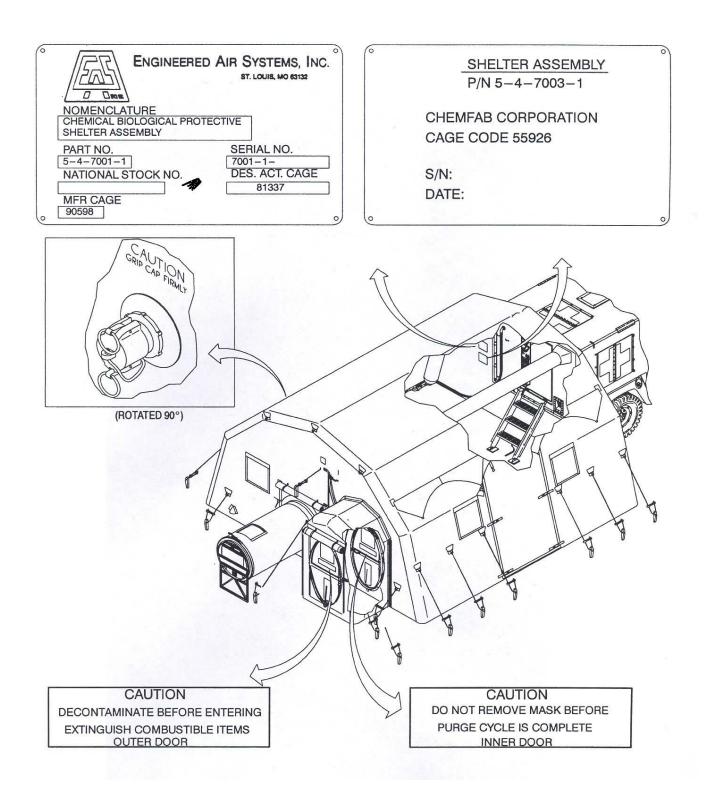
Decals and Instruction Plates (Sheet 8 of 10)
